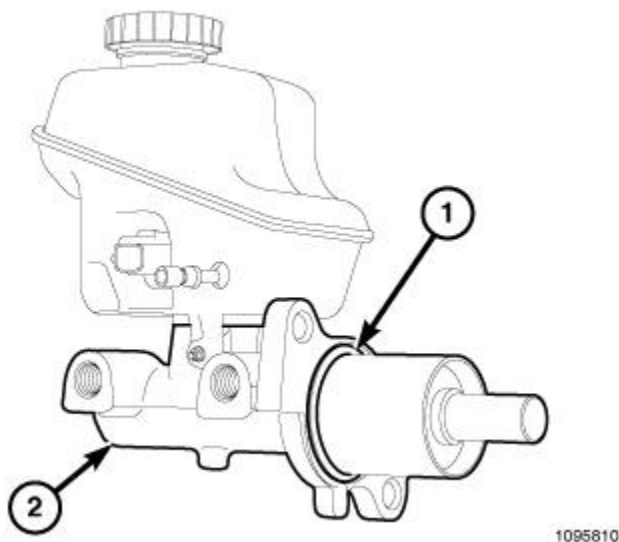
Vacuum Seal On Rear Of Master Cylinder
